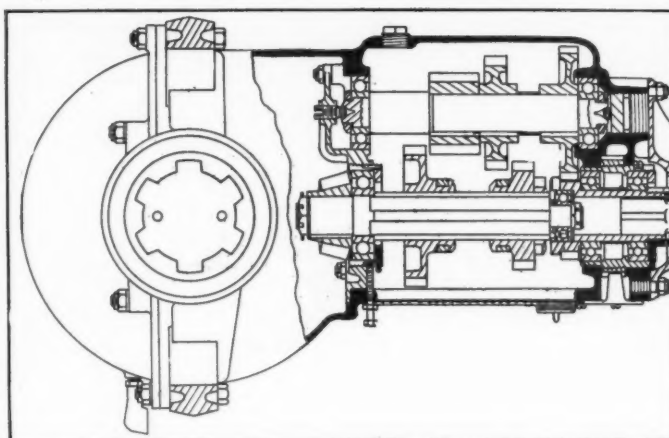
Sectional view of rear unit of Stearns car, in which the drive is taken directly from the gearbox to the differential
